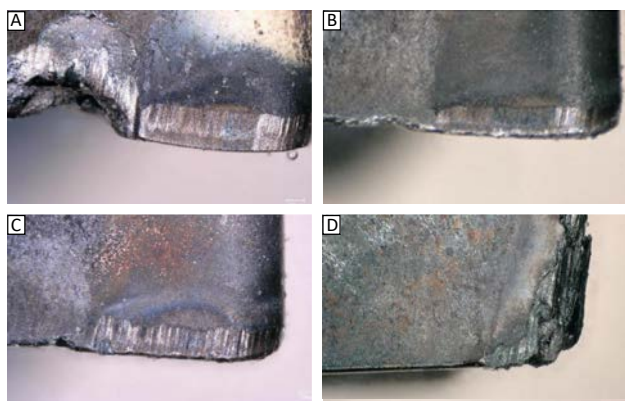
Tool-wear after reaching tool-life criterion. (a) C5 insert. (b) C8 insert. (c) TiCN insert. (d) WC-Co insert.
